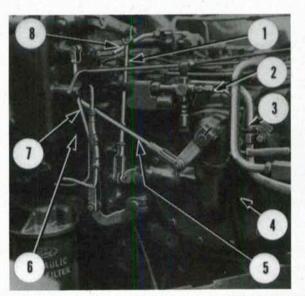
View of gearshift linkage on TW-35 tractor. Other models are similar.
